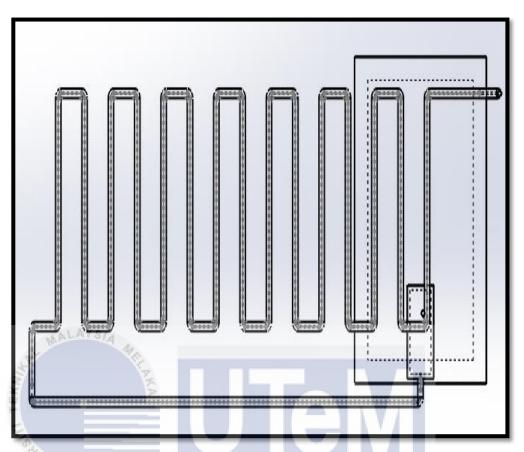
Picture of Top View Cooper Tube Installation on Upper Side of Car.
